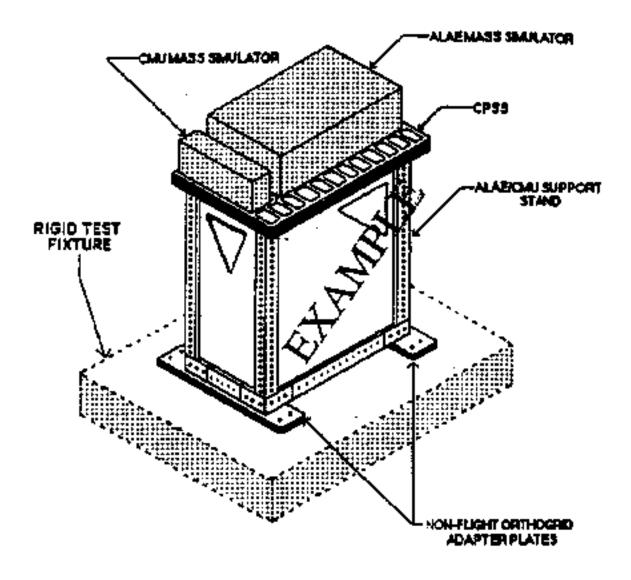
ALAE/CMU SUPPORT STAND ASSEMBLY TEST ARTICLE
